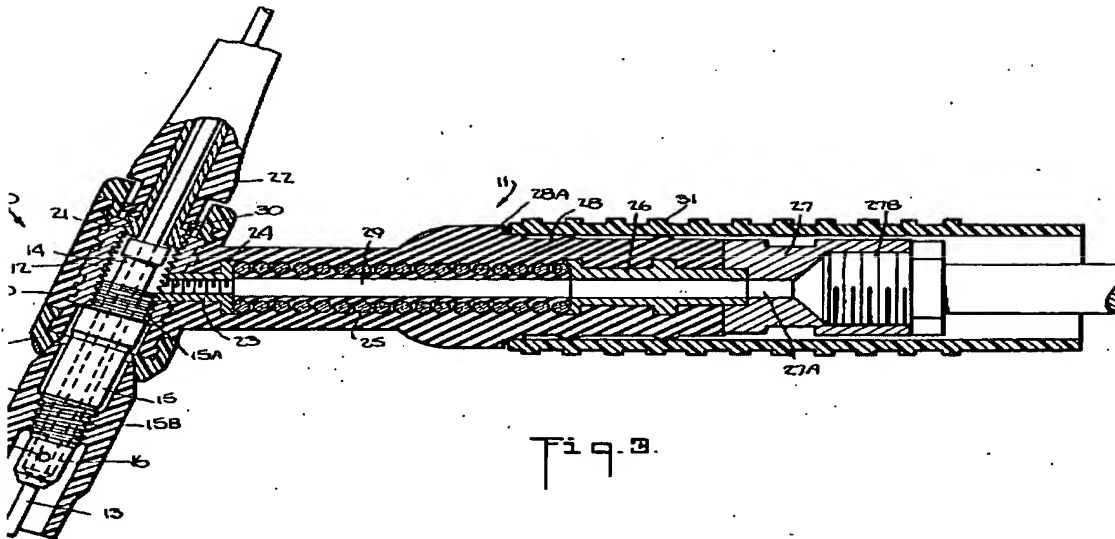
of Keller depicts a welding torch. Fig. 3 and the relevant description thereof (see e.g., col. 4, ll. 7-50) teach a torch head with a plurality of tubes (tube 26 and the unnumbered tube to the right of bore 27B) operable to convey fluids (that is, the tubes are capable of conveying fluids) and a plurality of coils comprising a helix of non-tubular material (“...a double helix 25 is formed by a pair of side-by-side coils...” as described in
